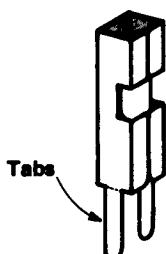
Exploded view of circuit board pin and ferrule.
